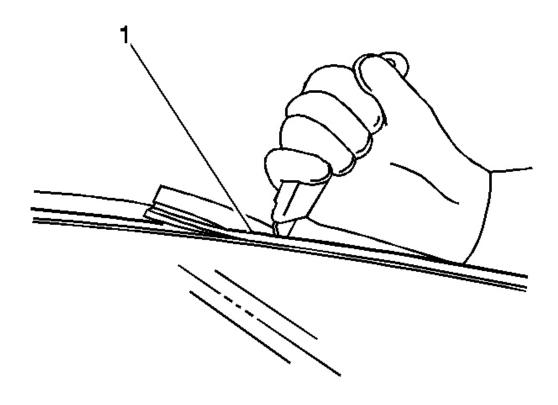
Using Utility Knife To Remove Reveal Molding Courtesy of GENERAL MOTORS CORP.
